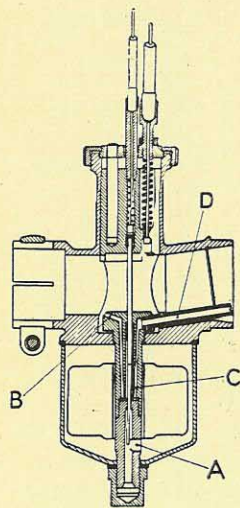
SECTIONAL ARRANGEMENT MARK 6E CARBURETTER
